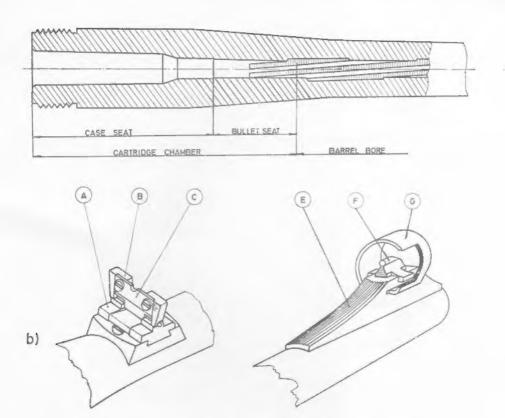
a) Rear part of the barrel, sectional view b) Rear and front sight
